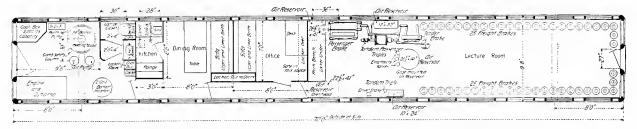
Floor Plan of International Correspondence Schools Air Brake Instruction Car. Interior View is Shown in Fig. 214.
